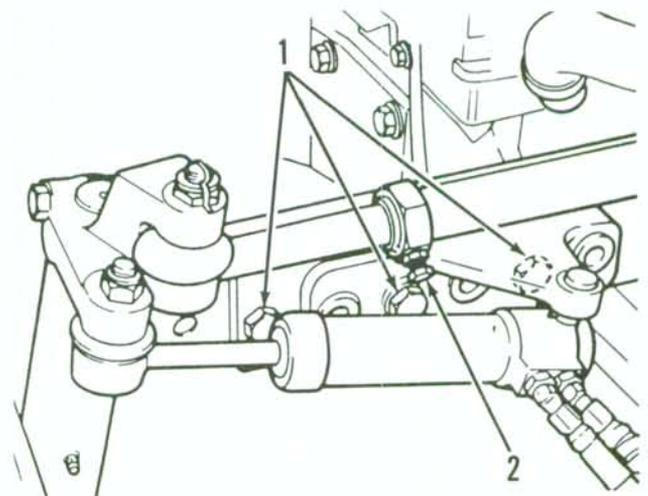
View of axle left end typical of 340-360 models. Track adjusting screw and lock nut (2) and cylinder bracket and axle extension screws (1) must be properly installed and tightened.
